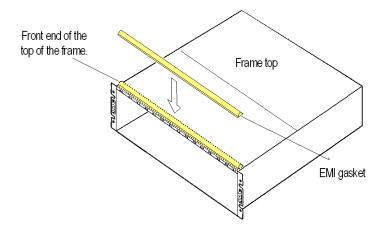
Position for Attaching EMI Gaskets (Expansion Unit)
